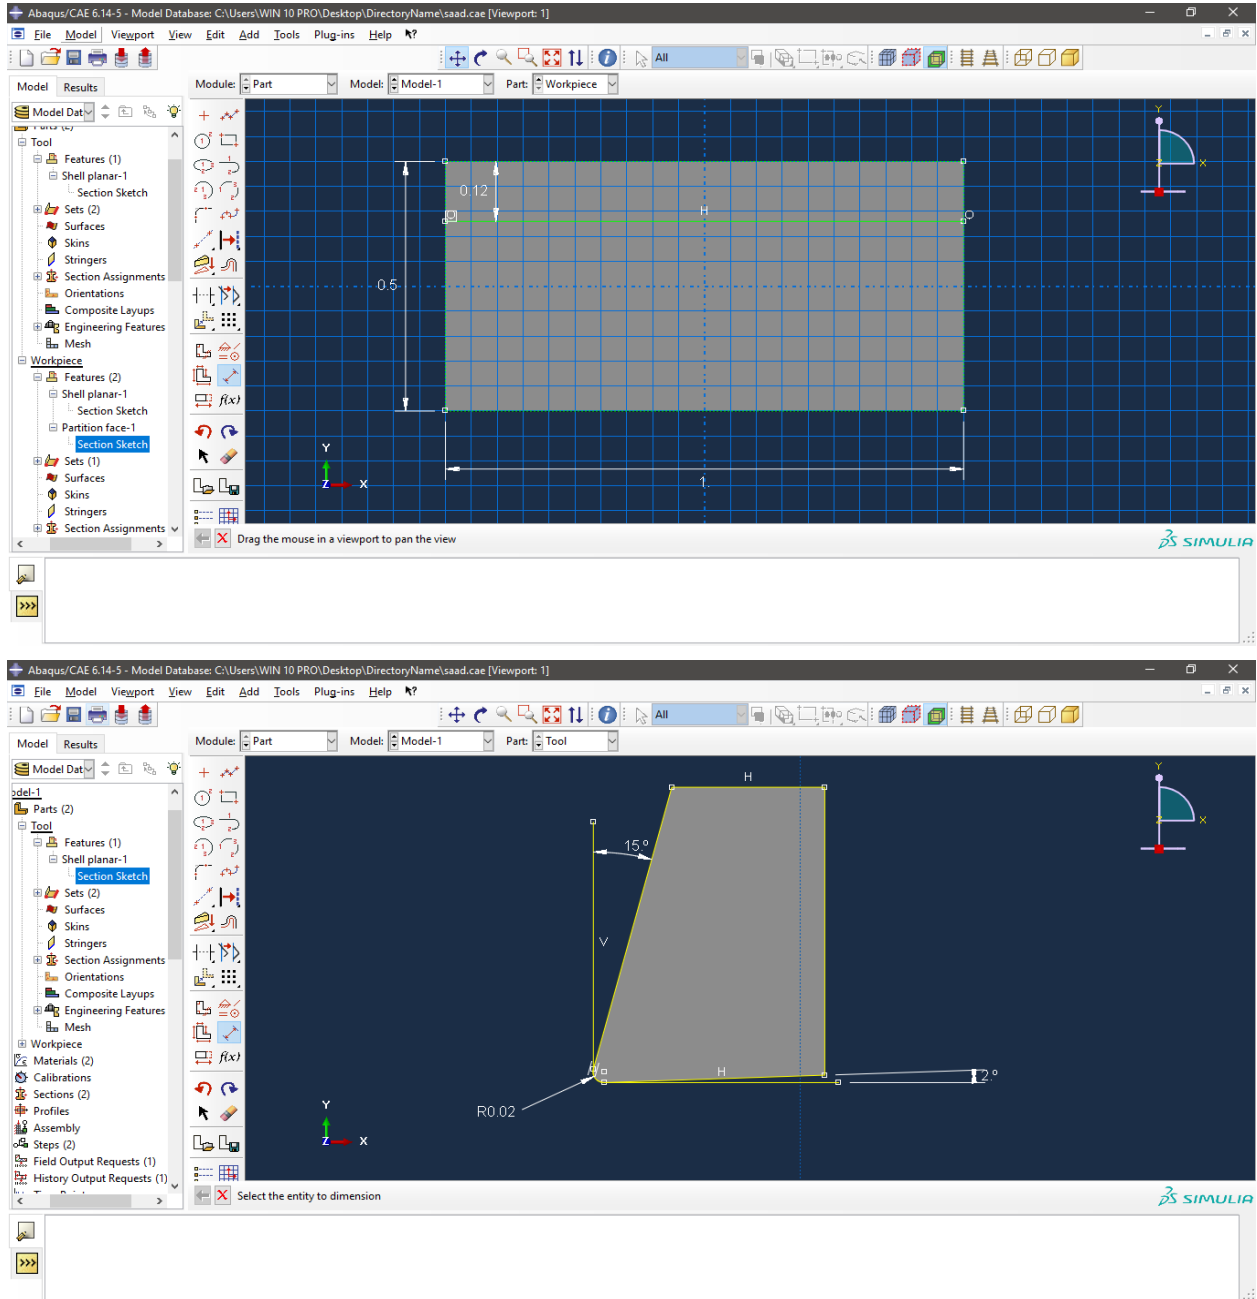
Geometry of the workpiece (top) and the machining tool (bottom)
